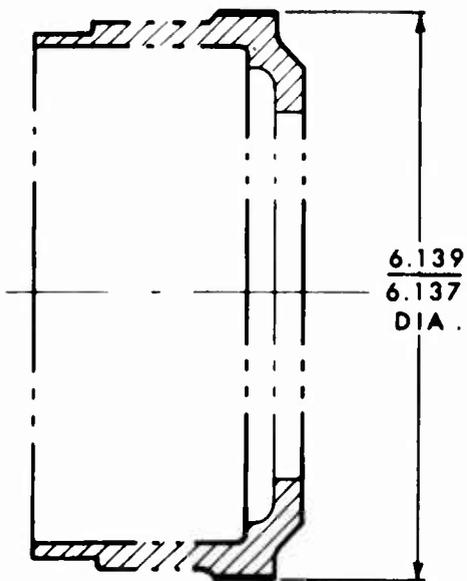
RG351-11181-106 Machine Operation Drawings (Sheet 2 of 3).
